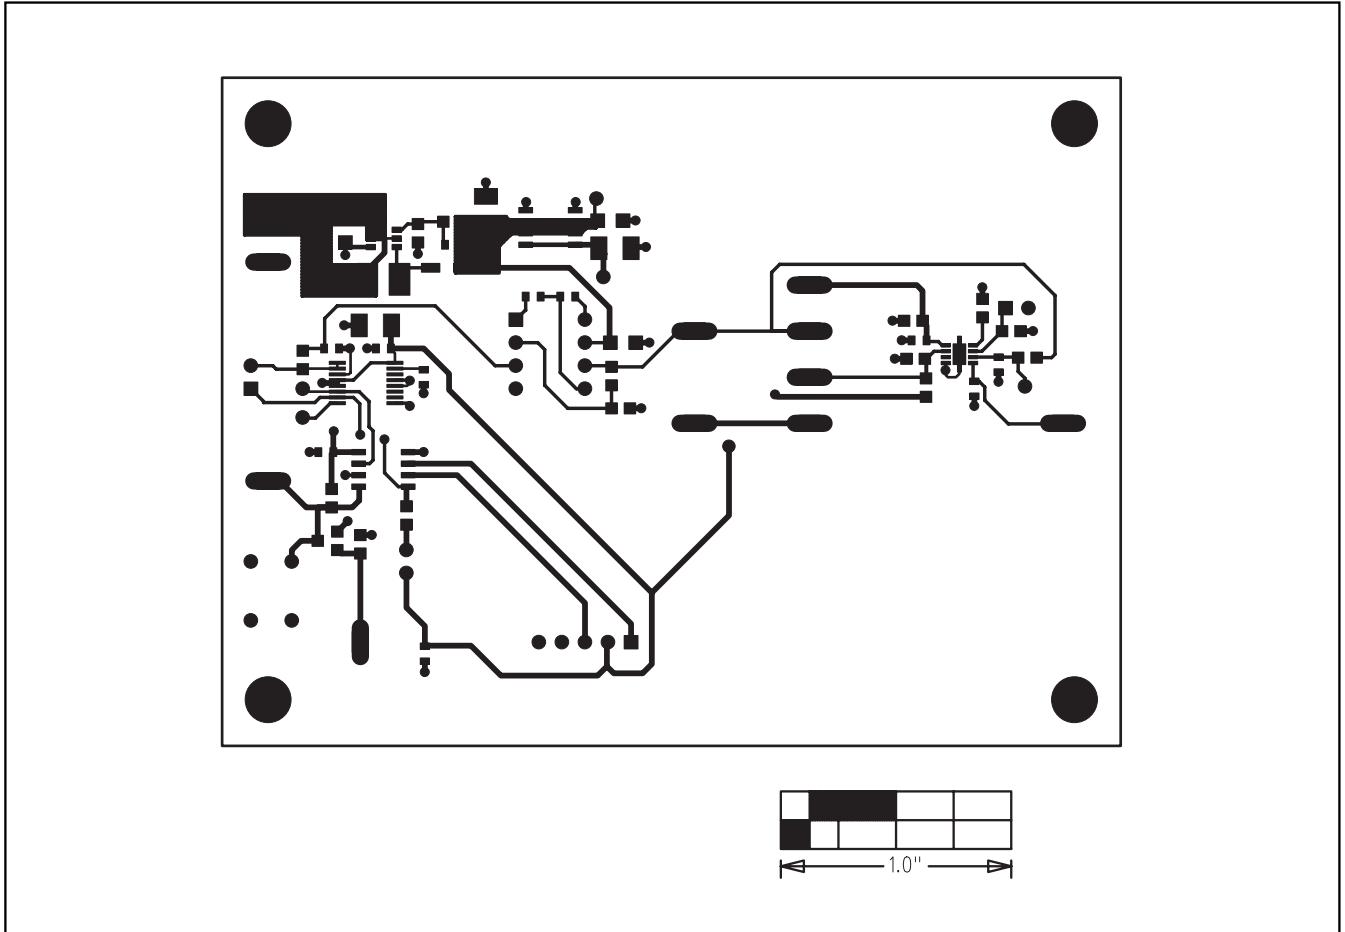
MAX1512 EV Kit PCB Layout—Component Side
